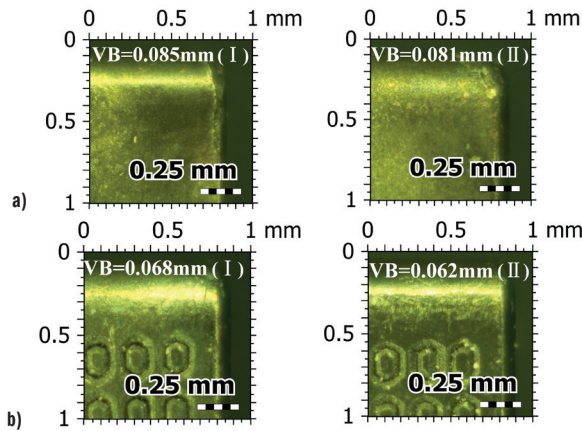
Tool wear before and after lubrication; a) non-lubricated condition; and b) lubrication condition (all units in mm)
